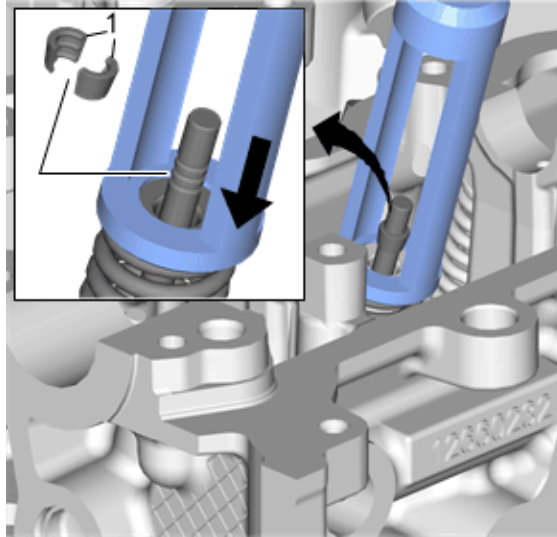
Special Tool To Remove/Install Valve Stem Keys
